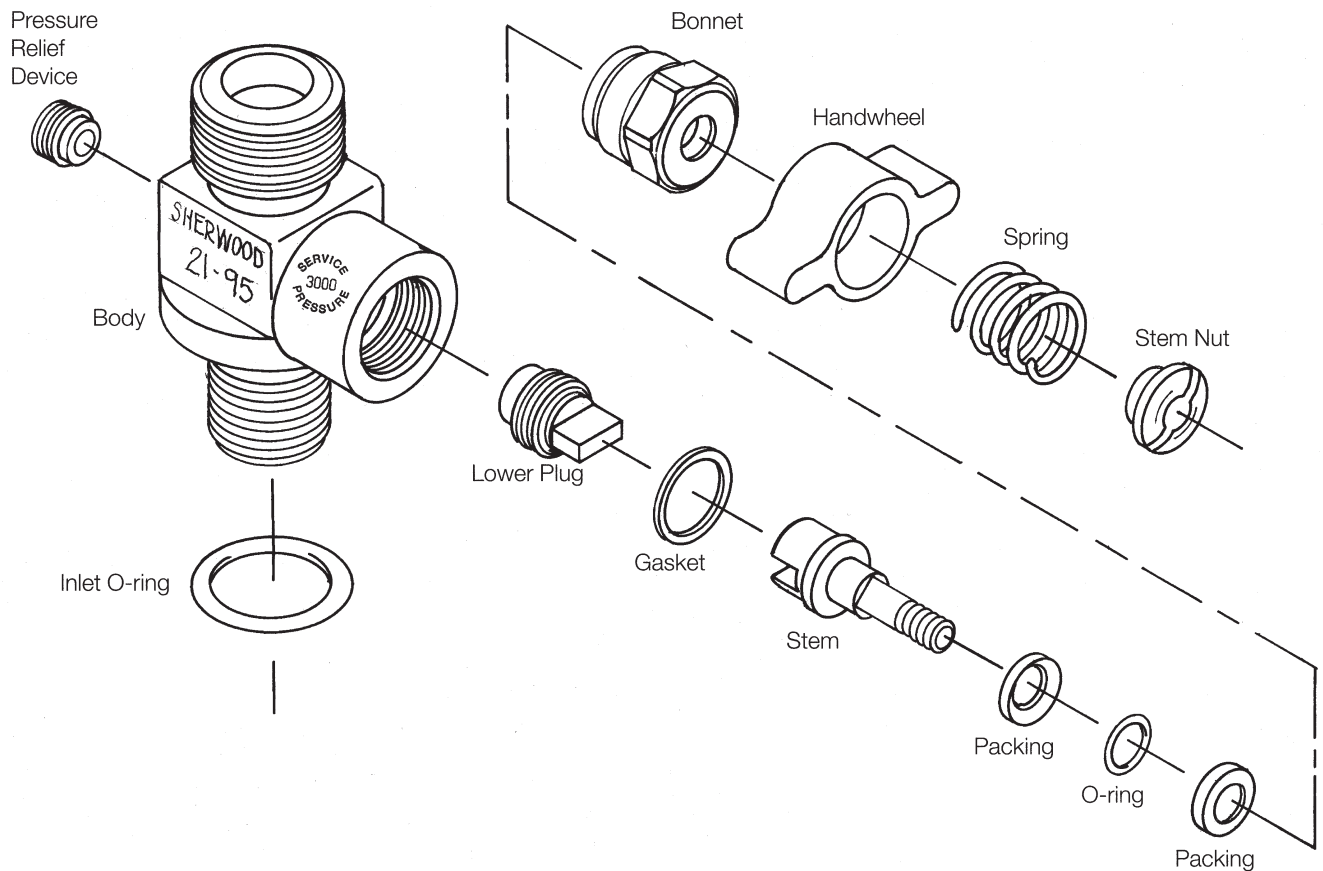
"YVB" SERIES VALVE ASSEMBLY
